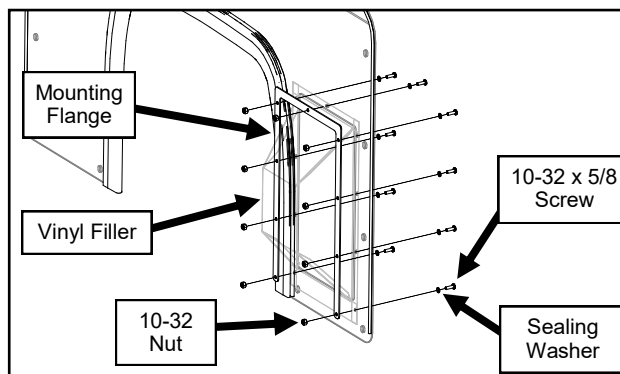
(Pre-Assemble Vinyl Filler to Cowl)
